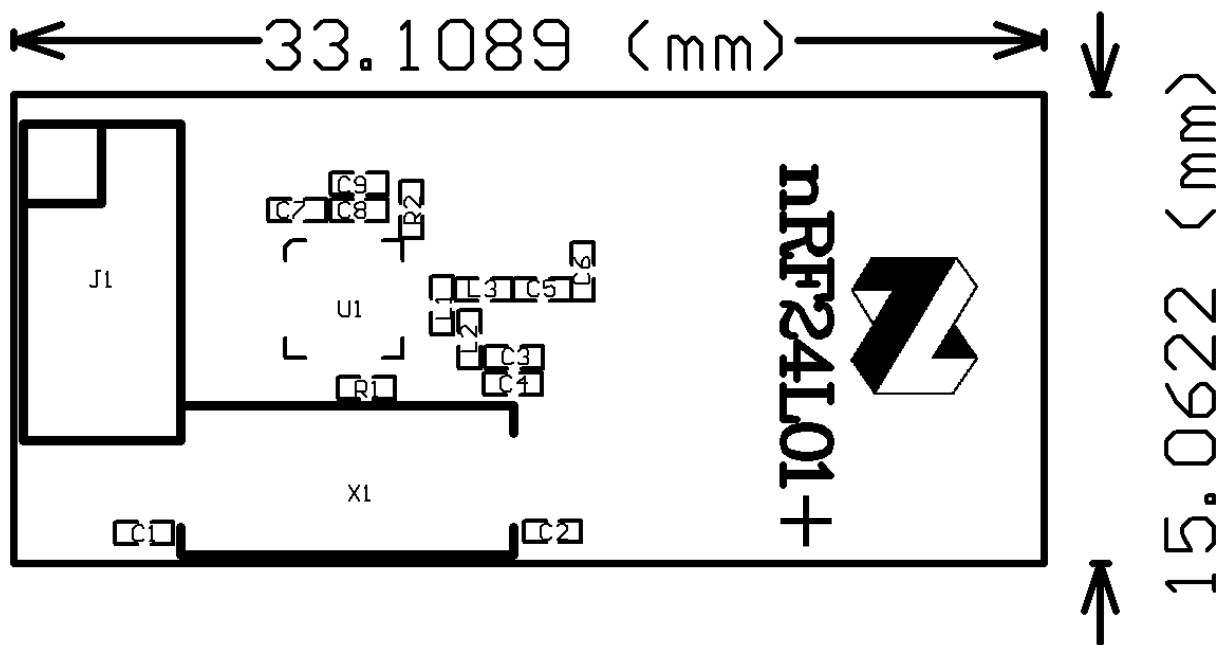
Top overlay (nRF24L01+ RF layout with single ended connection to PCB antenna and 0402 size passive components)
